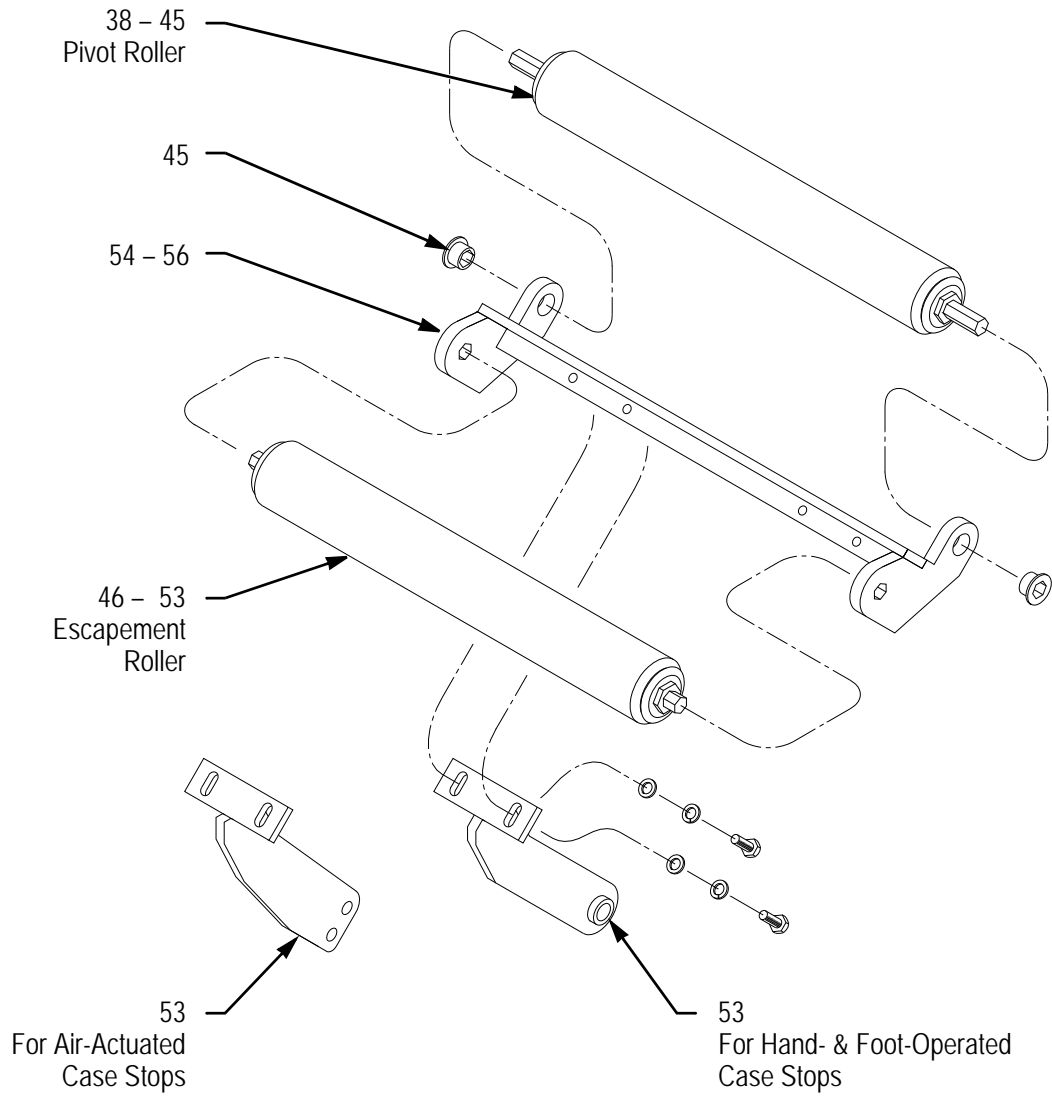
Pivot Assembly - 3" & 6" Roller Spacing
